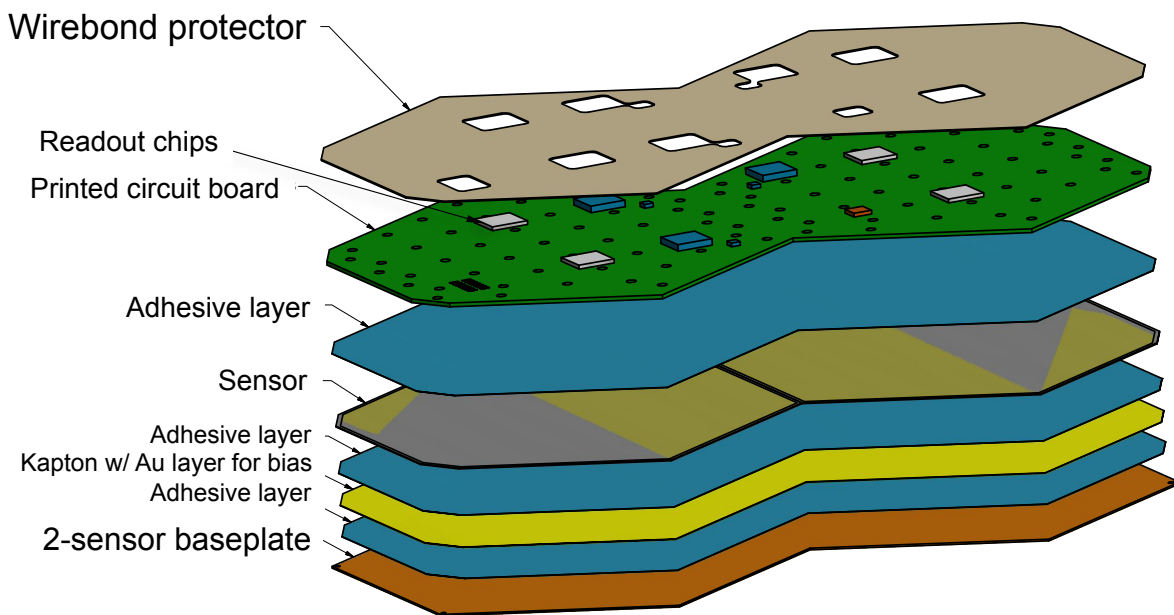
Module exploded view. Replace with 8" diagram.
